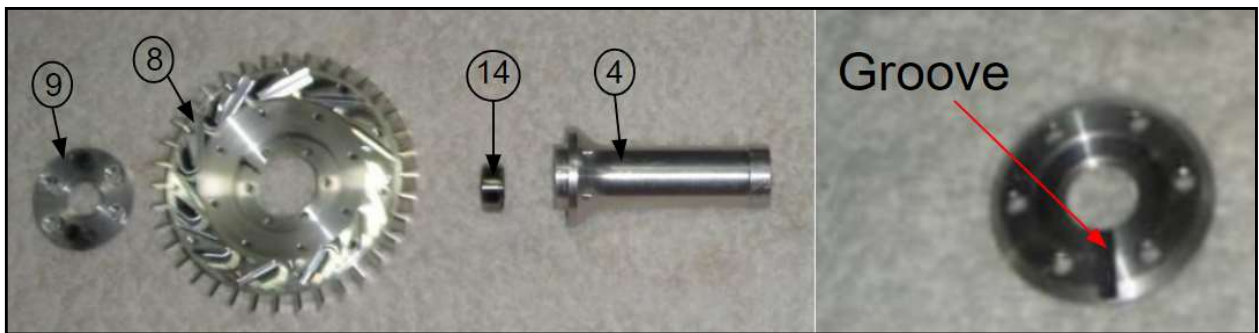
Exploded view of engine parts. (Red arrows are solely for visibility)
